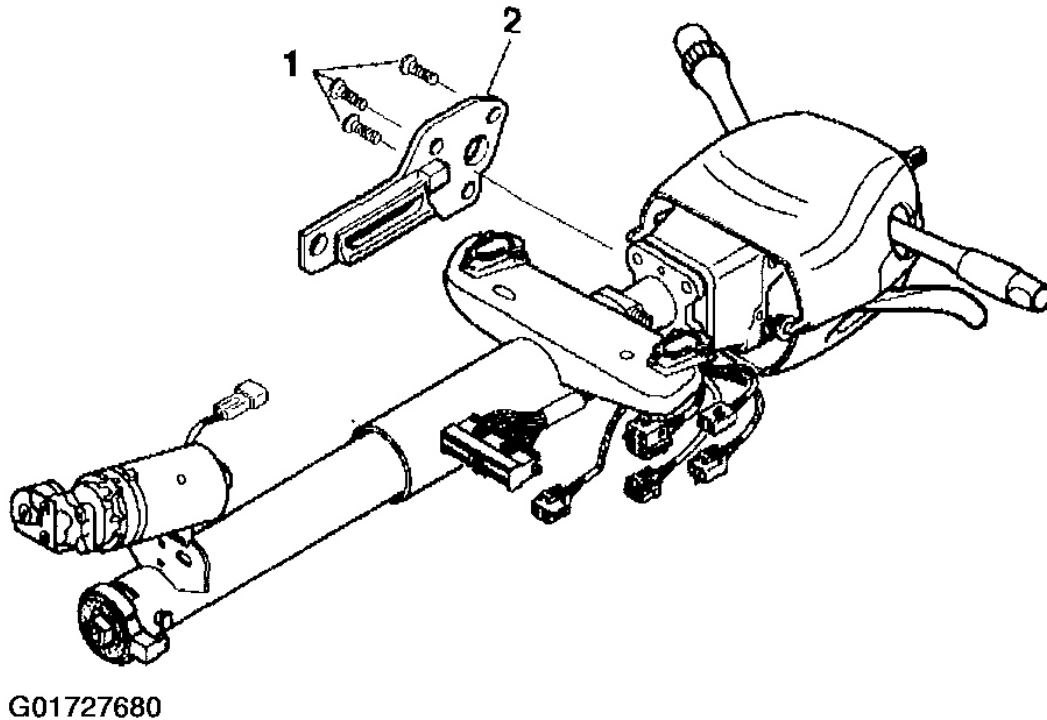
Removing Telescope Adapter Assembly Retaining Screws
